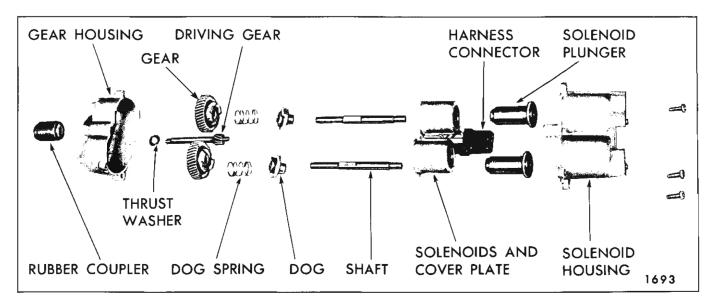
H16-Exploded View of Four-Way Seat Transmission
